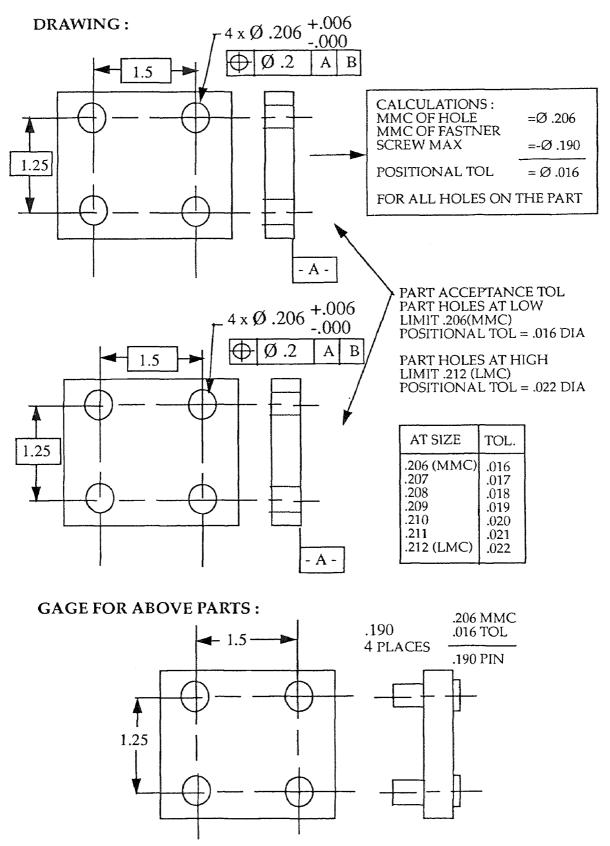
Floating Fasteners - Positional Tolerances for Mating Parts
